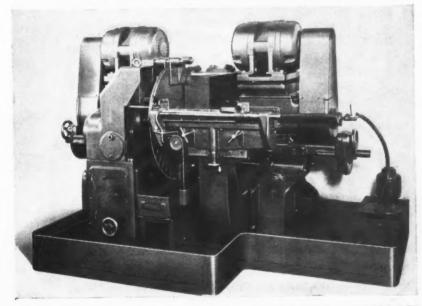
(Center) A Roll-feed Disk Grinder with One Wheel Removed to Show Details of Roll-feed Mechanism
